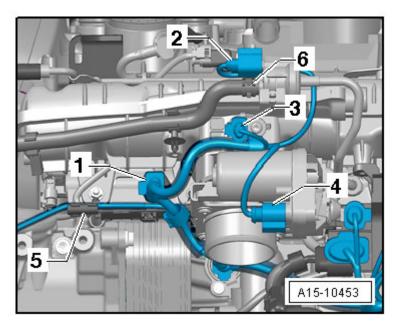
EVAP Filter Vacuum Hose, Electrical Connectors And Electrical Cable
